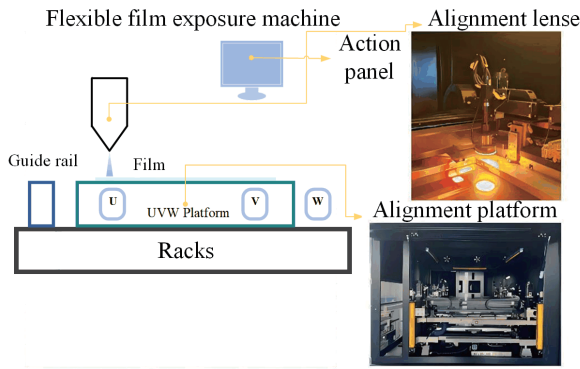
Alignment mechanism of flexible-film exposure machine.
